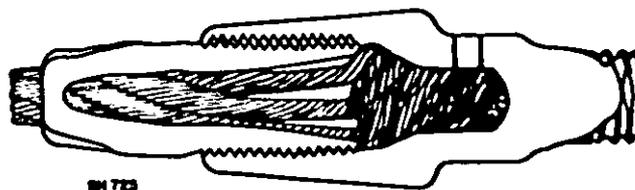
Fiber core wedge, cutaway view showing inspection hole.
